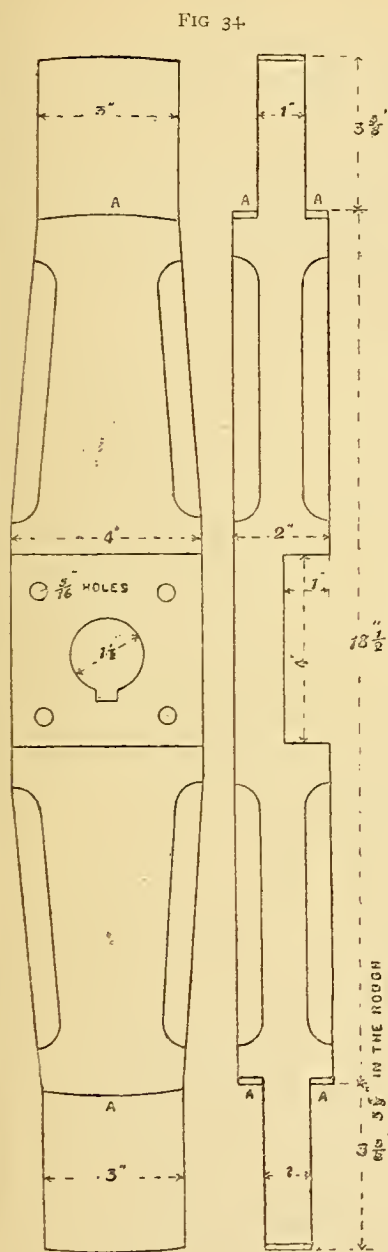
DETAILS OF FLYWHEEL ARMS.
